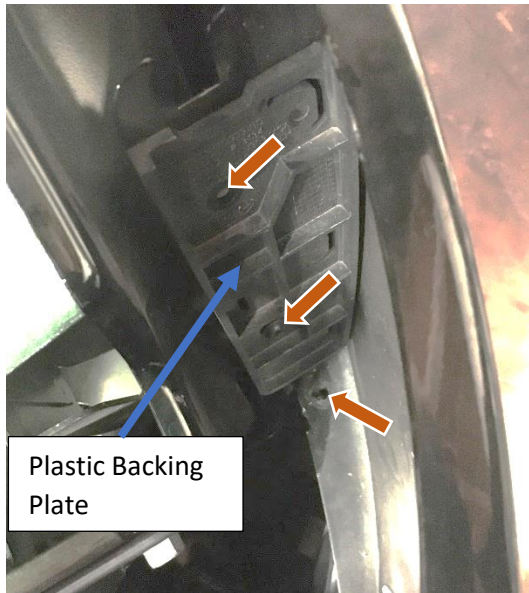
Plastic Rivets (Top) and Bolts (Bottom) to be Removed
